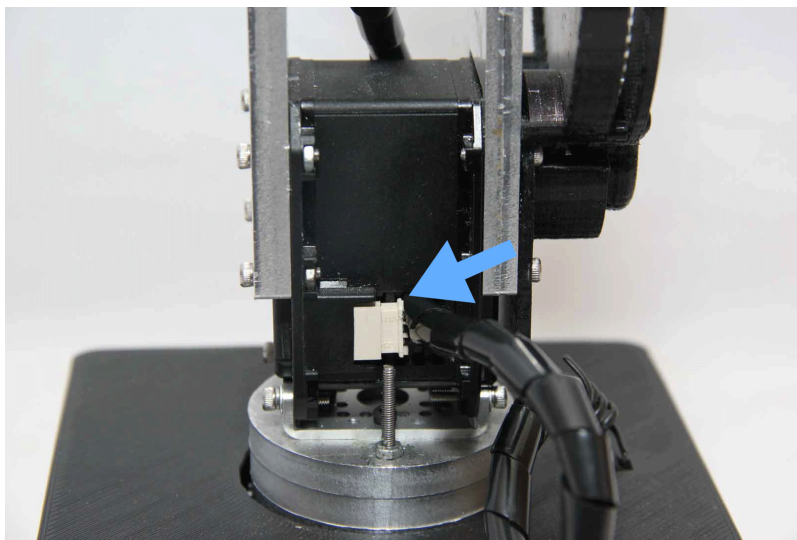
Install the cable from the baseplate into the lower arm motor.
